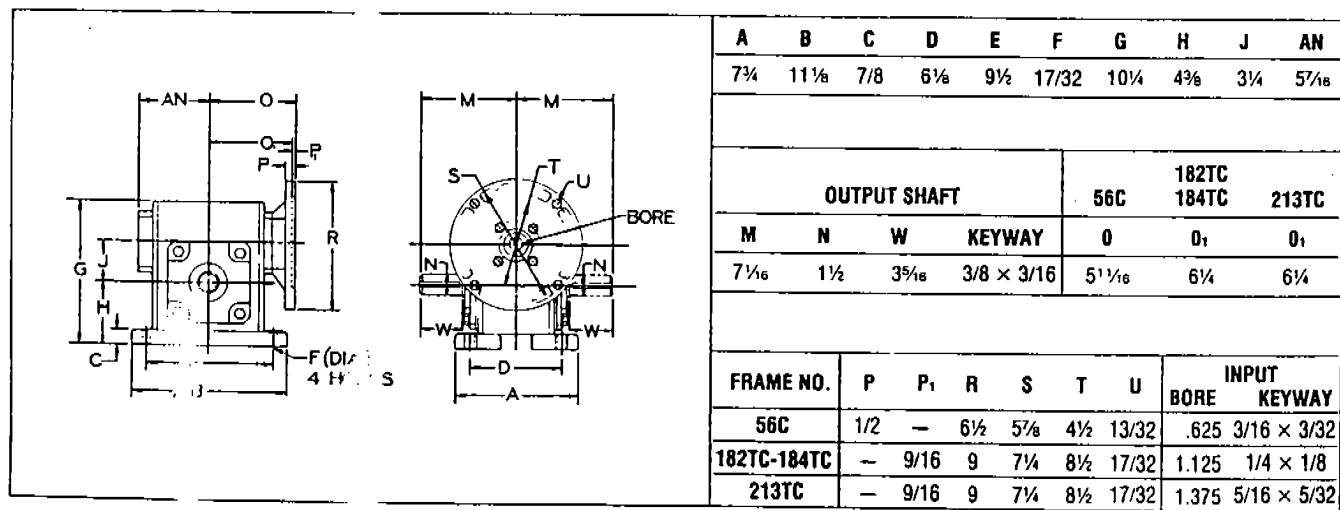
Dimensions of Reducer with Optional 6X501 Horizontal Mounting Base
